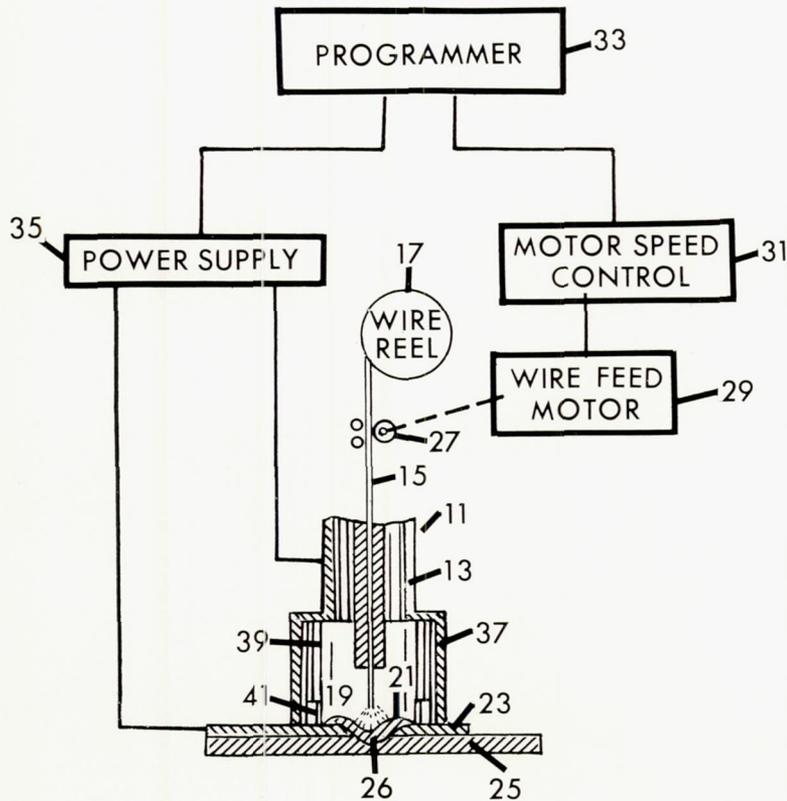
Schematic drawing showing improved method of electric arc spot welding.
